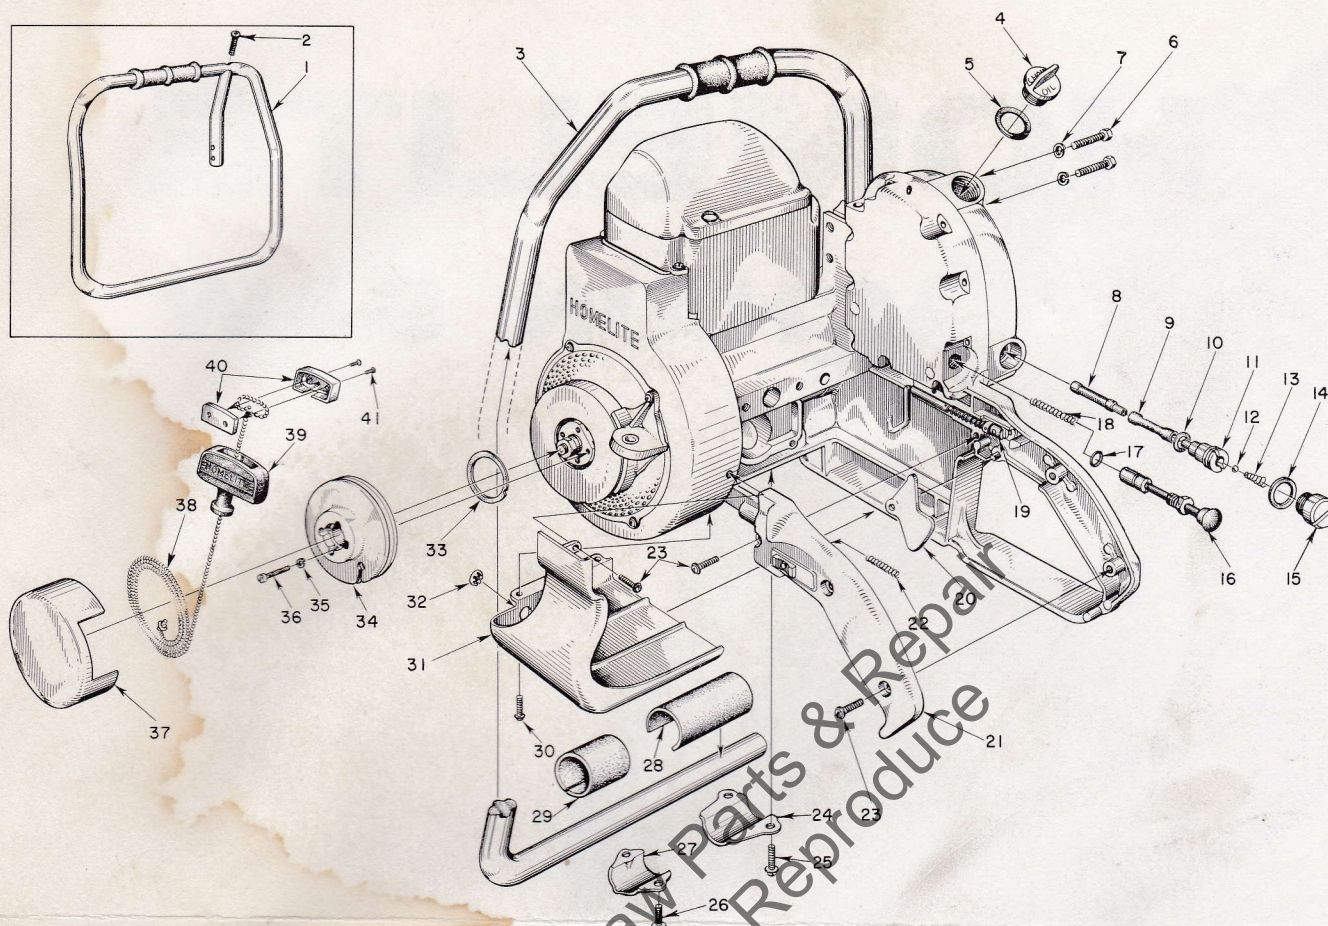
STARTER, HANDLE, GRIP AND LUBRICATOR PARTS
